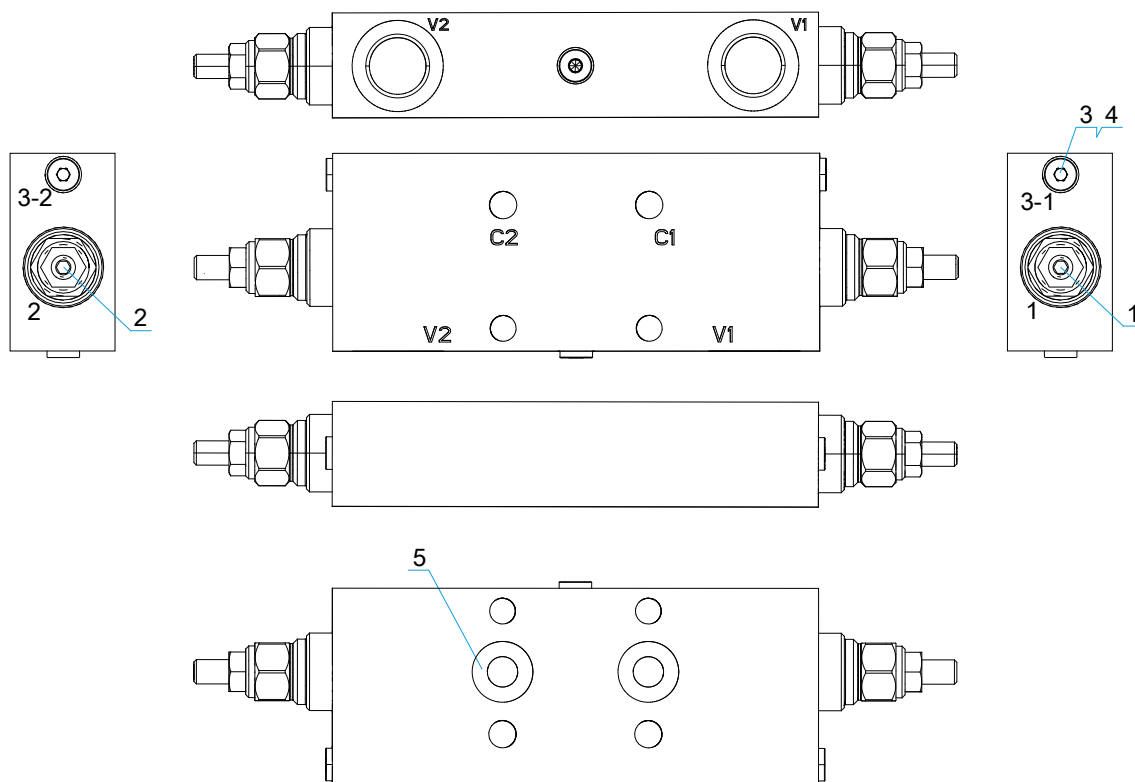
Brake & Two-speed Control Valve Manifold (PN.202040003258)
